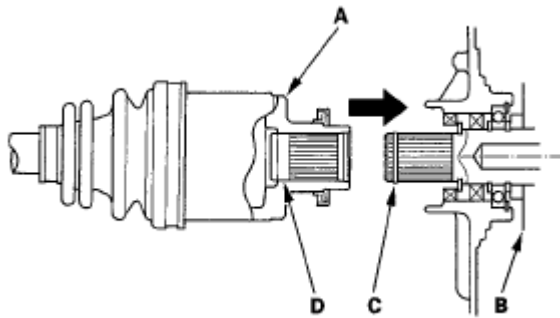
Installing Inboard End Of Driveshaft Into Differential
